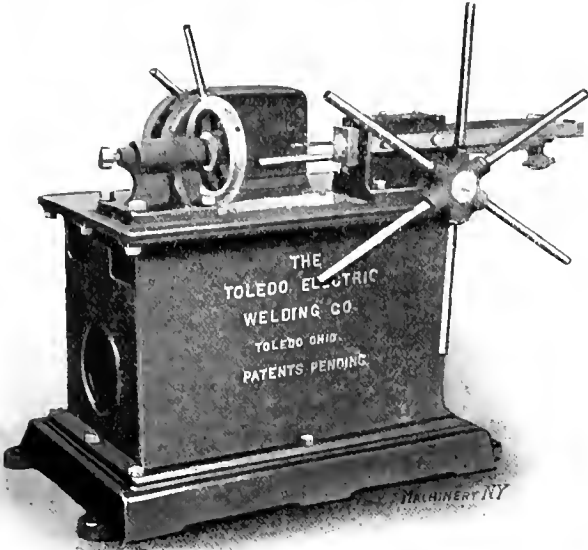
Machine for Electrically Welding Small Drills to their Shanks
